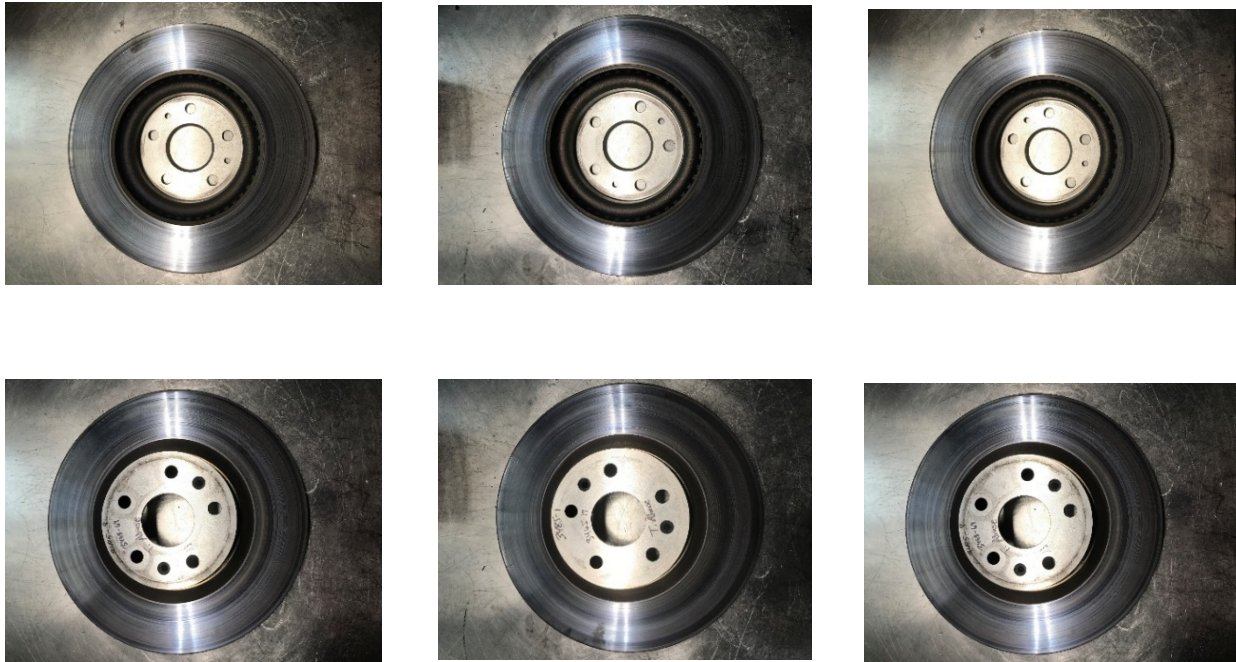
Post test parts from Thermal Cracking tests on processed rotors
